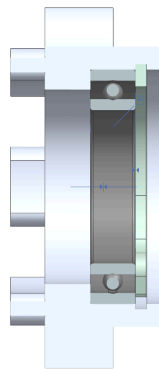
Free-spinning input gear cross section highlighting the inner bearing it rides on.
